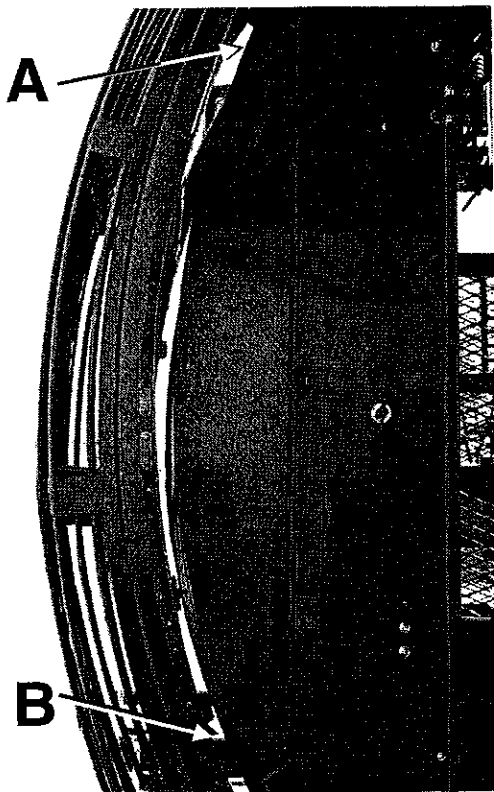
Retainer Assembly Distance From Wheel Elevator.
